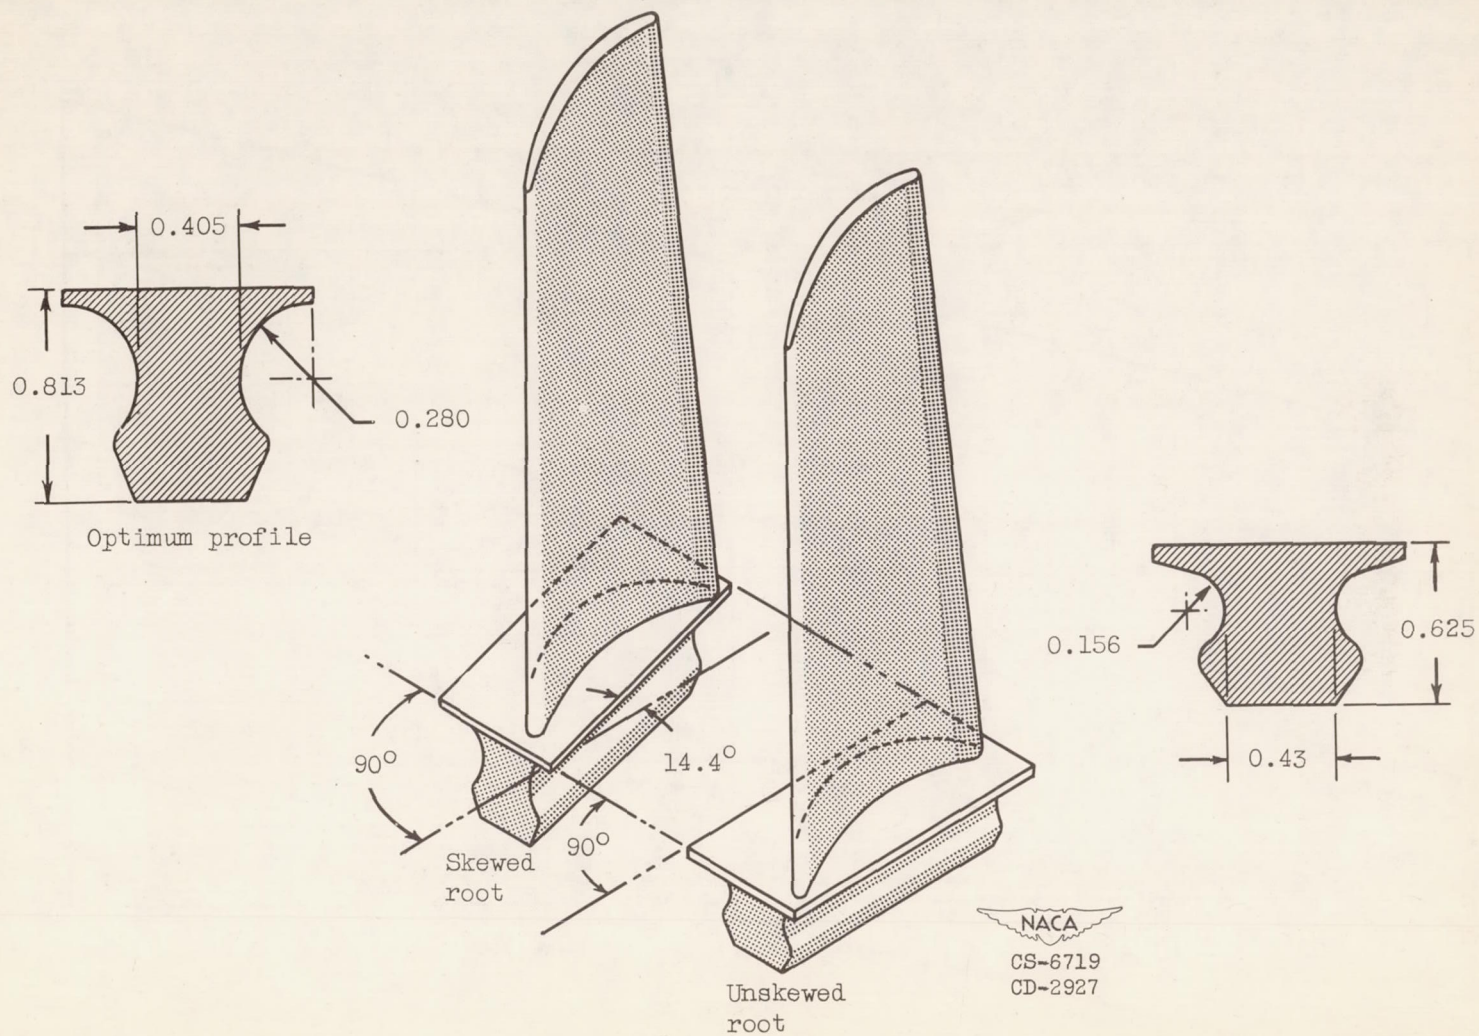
Dimensions of standard and skewed dovetail cermet blades. (All dimensions are in inches.)
